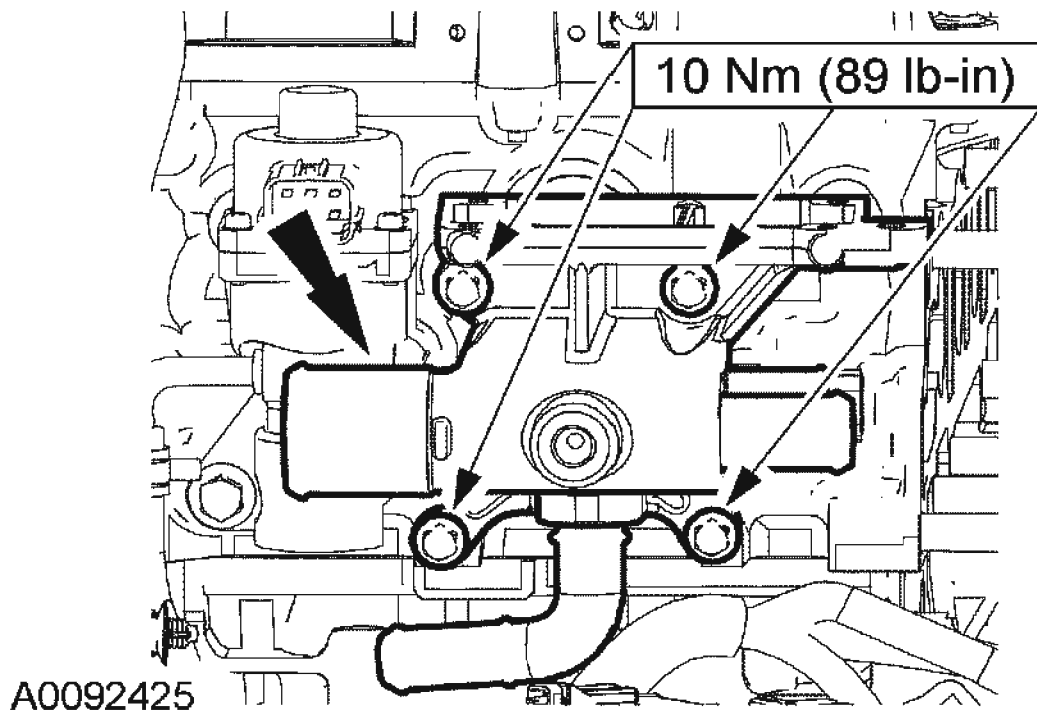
Installing Coolant Bypass Bolts Using New Gasket
